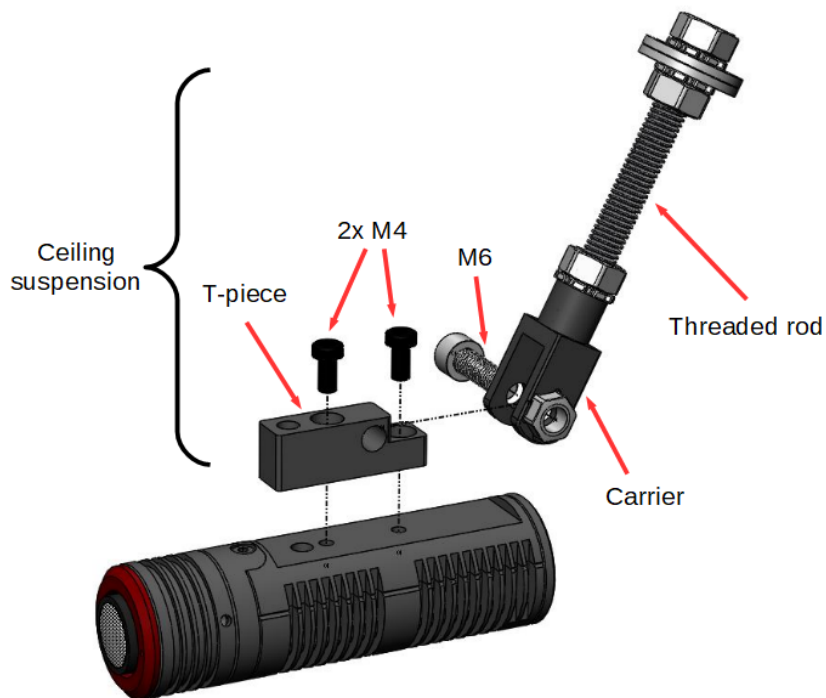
Attaching the ceiling suspension to the ARTTRACK6/M camera
